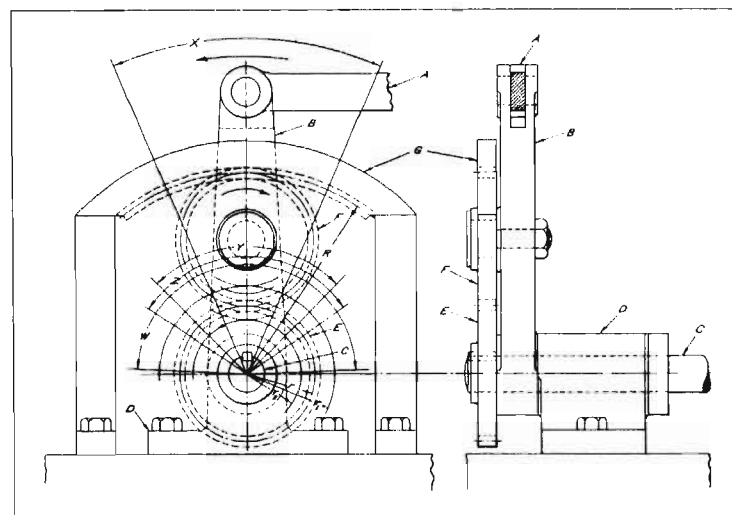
By introducing an idler gear *F* and a gear segment *G* the oscillation of arm *B* and shaft *C* can be increased without changing the throw of an eccentric-operated rod *A*.
